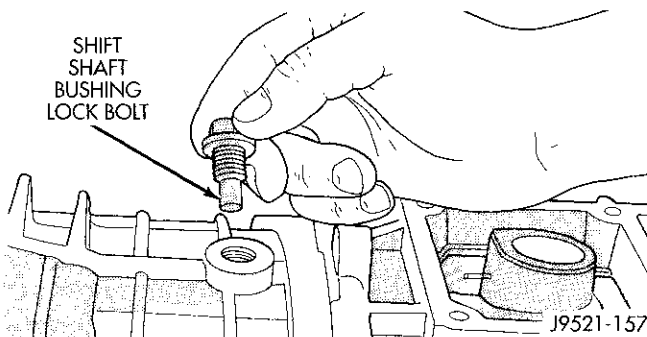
Installing Shift Shaft Bushing Lock Bolt
